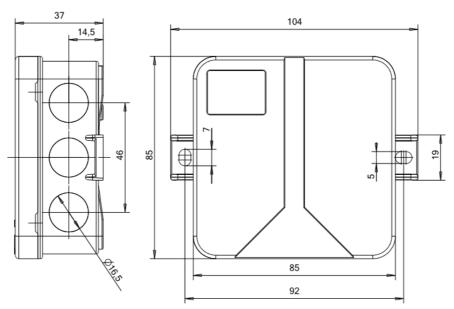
The dimensions of the C-AM-0600I module Notes:
